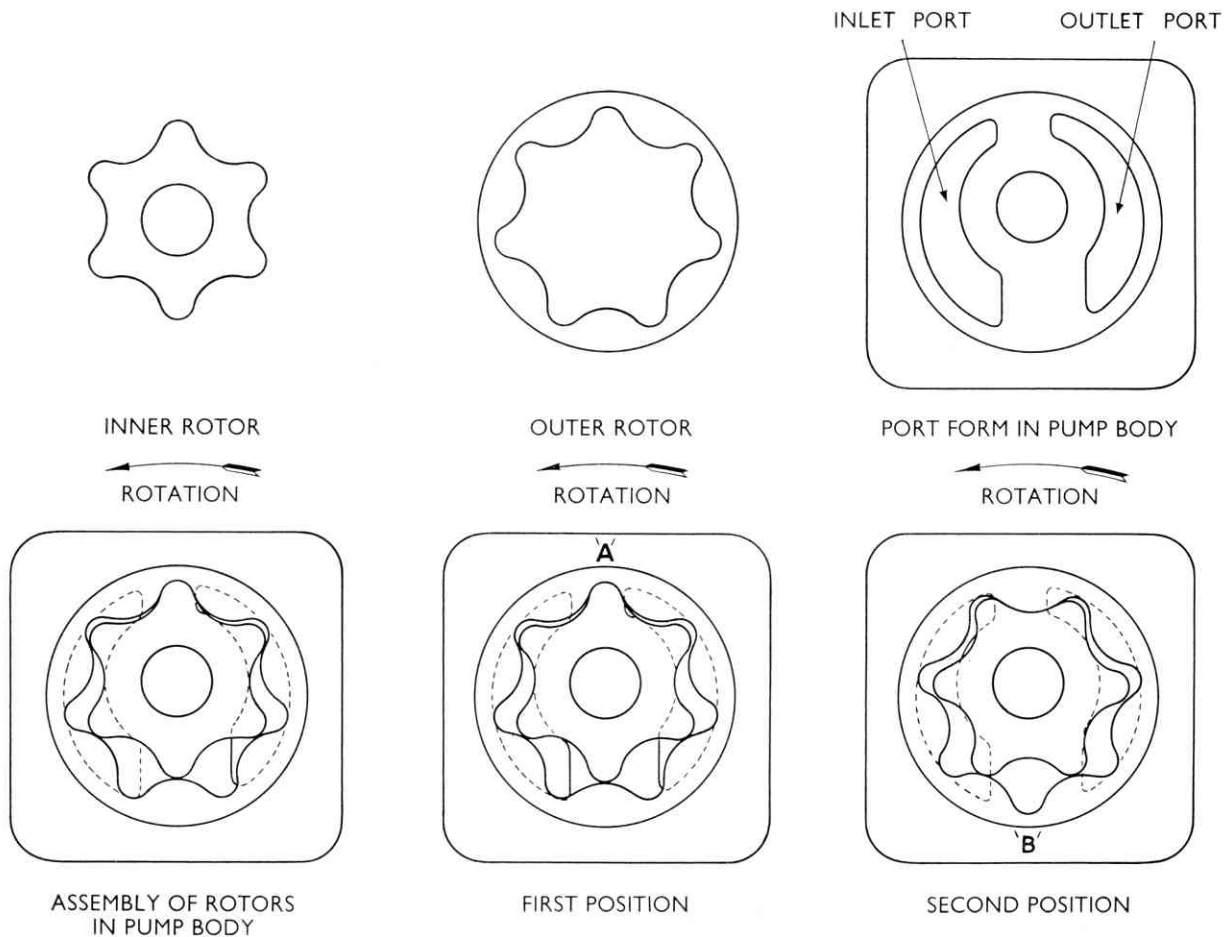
ASSEMBLY OF ROTORS IN PUMP BODY
